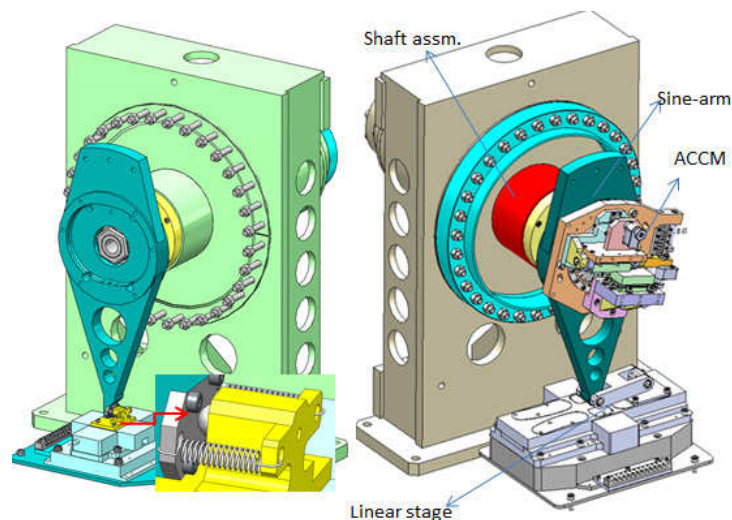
Left: *Ruby ball interface*. Right: *Linkage with flexure bearing joints*.
